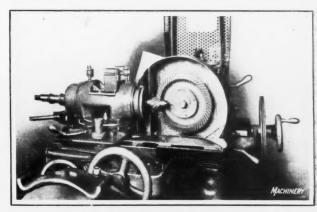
Burnishing the Teeth of Spiral Bevel Pinions
